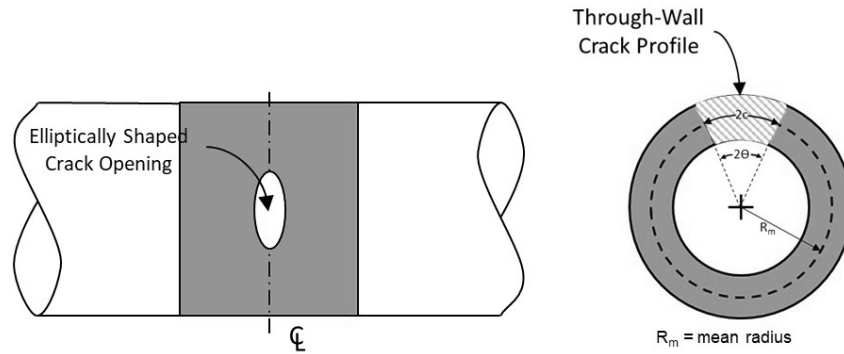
Weld Joint Configuration with Assumed Crack Location and Crack Shape
